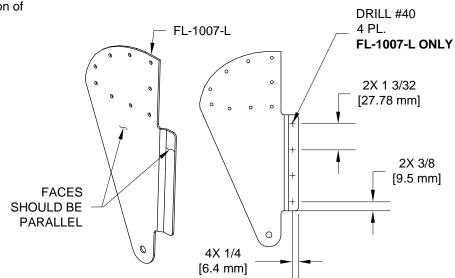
DRILL LEFT HINGE BRACKET FLANGES
